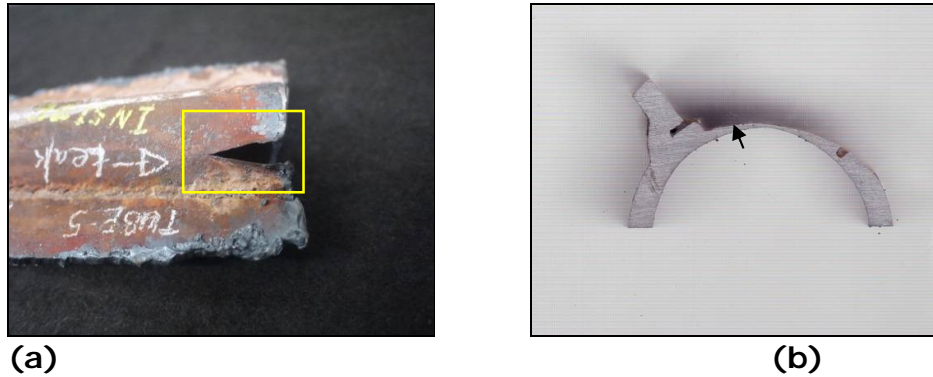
Photographs giving (a) close-up view at the failure location displaying fish-mouth type rupture opening and (b) transverse sectional view near failure location showing thinning because of metal wastage essentially from outer surface
